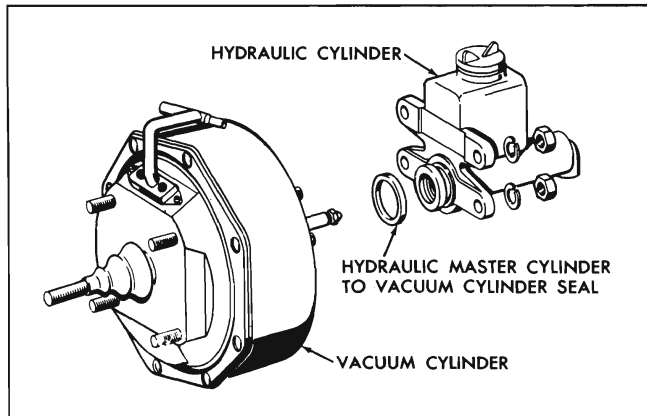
B-8 Master Cylinder and Power Brake Assembly Separated
